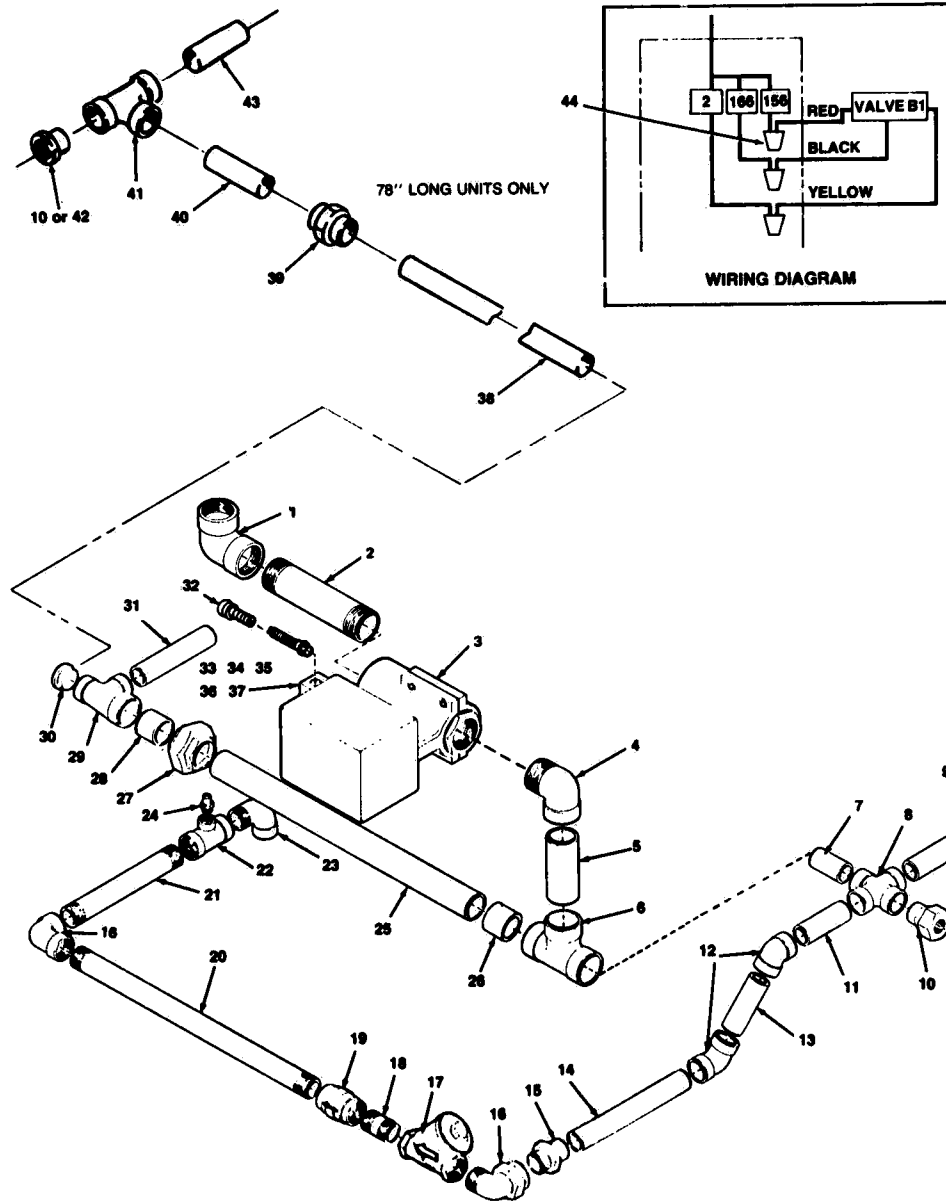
PIPING ASSEMBLY, Chamber Drain Line, Steam.
